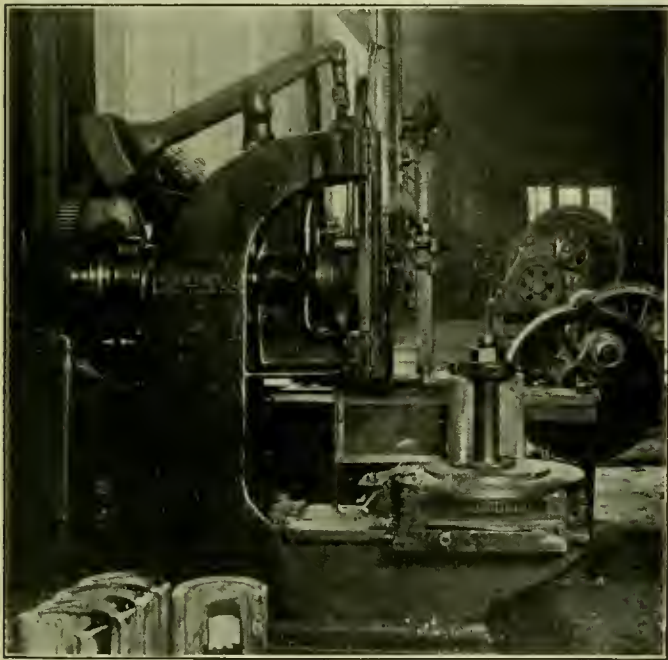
Slotter Arranged for Rapid Machining of Crown Brasses
